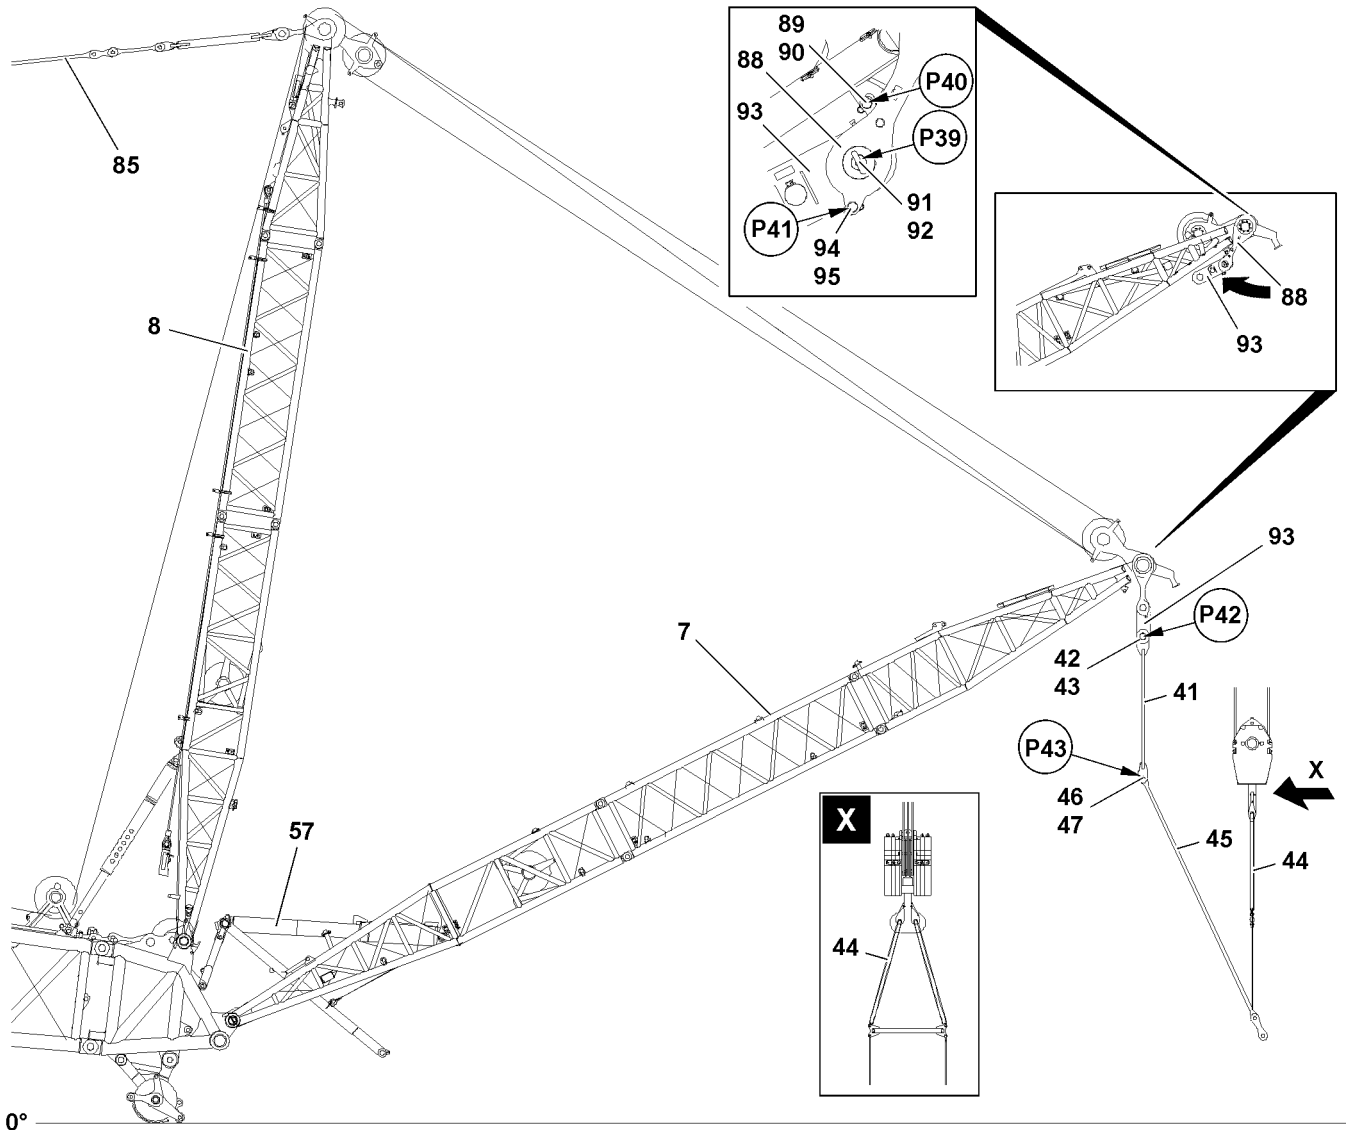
Disassemble the WA-frame 1 guy rods // bring the pull test bracket in transport position
